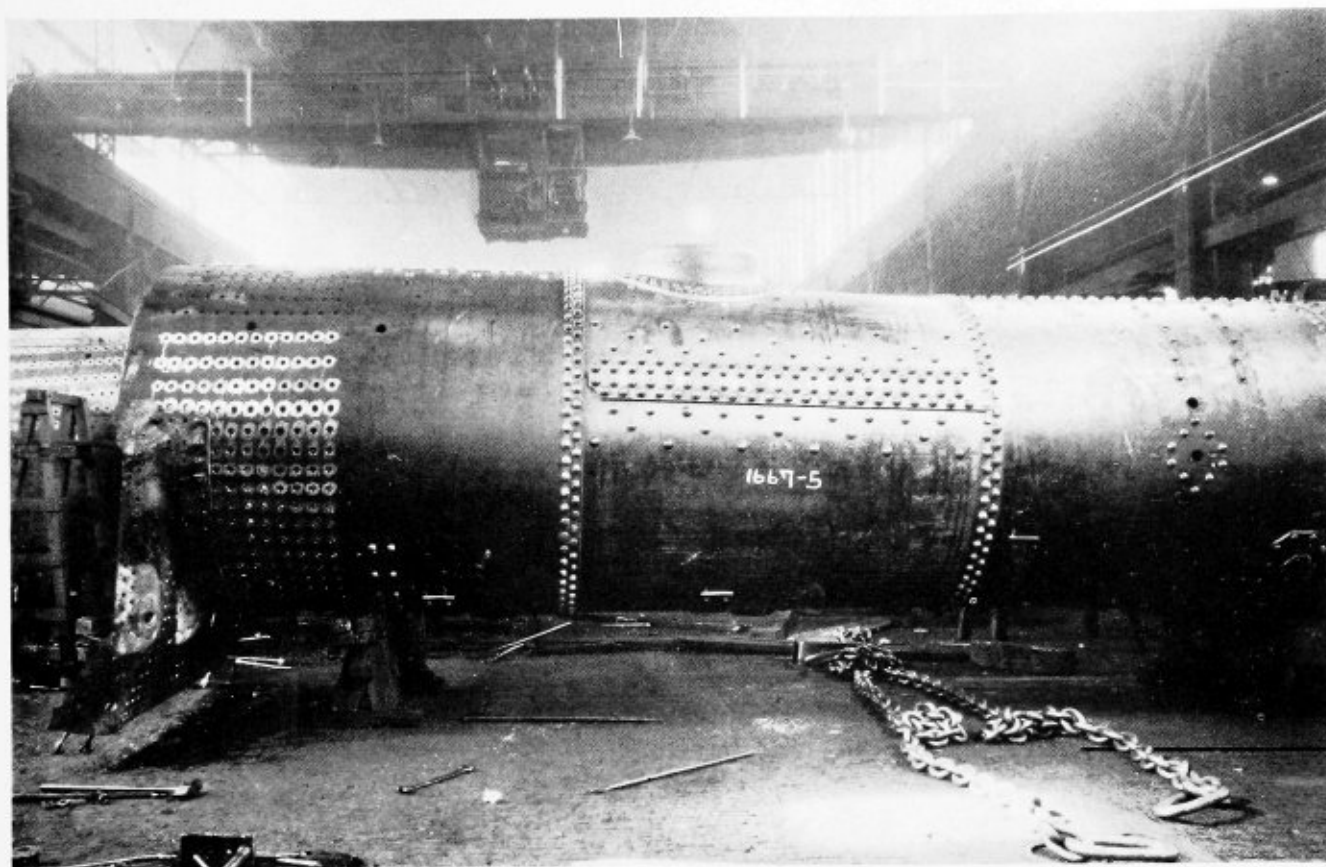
Front end assemblage with the throat sheet being bolted and laid up to the back shell course
